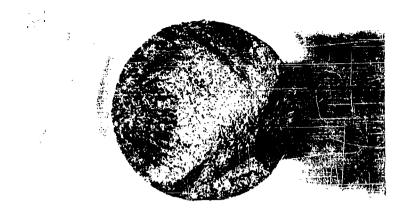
Failure Surface of a 2024-T4 Aluminum Specimen after Exposure to a Corrosive Environment for 1 Day and Cycled to Failure at ±26,000 psi. Specimen No. 2-7, 7X
